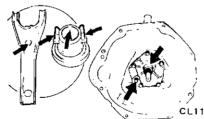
Lubricating points of withdrawal lever and front cover
